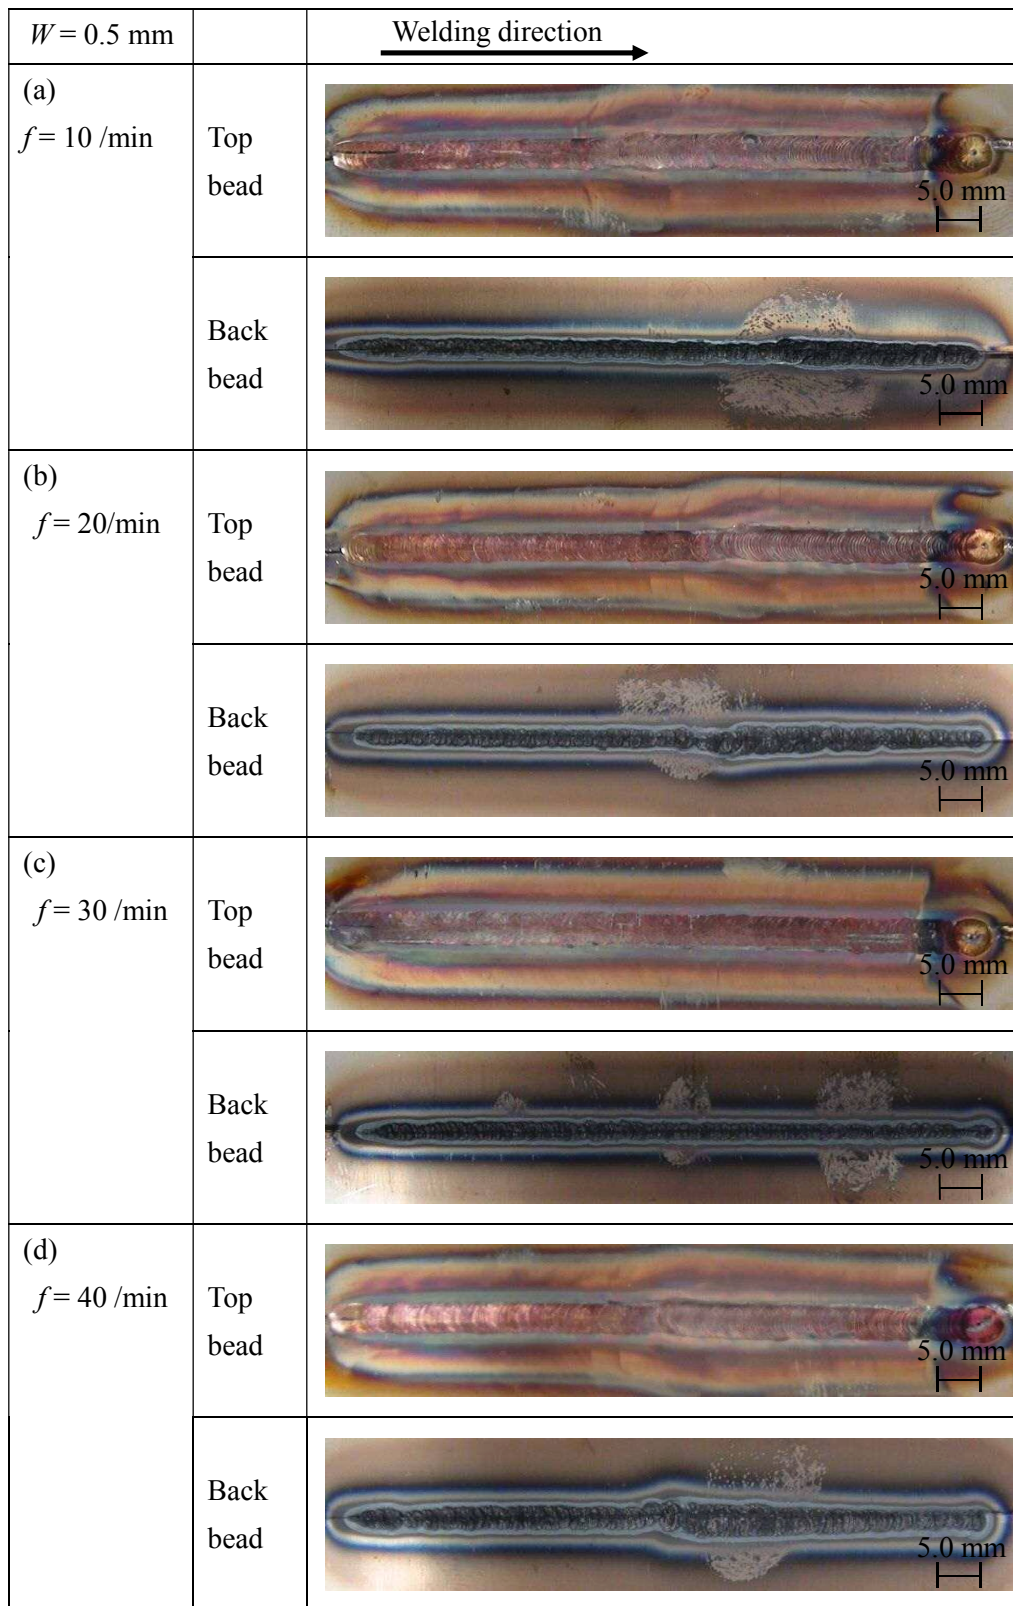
Appearance of hybrid welding beads using laser weaving ($W = 0.5 \text{ mm}$)
